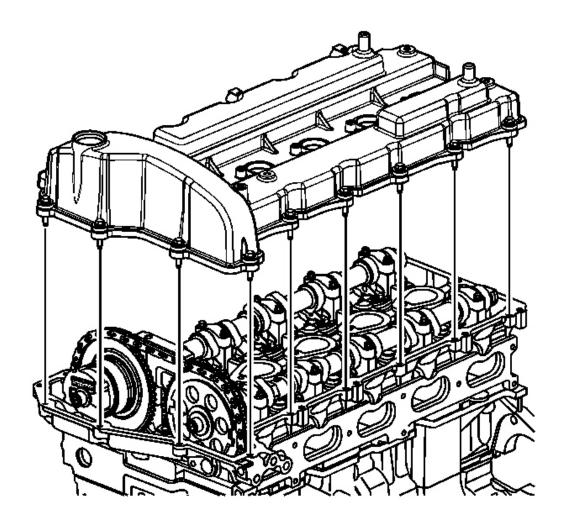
Identifying Camshaft Cover & Bolts Courtesy of GENERAL MOTORS CORP.
